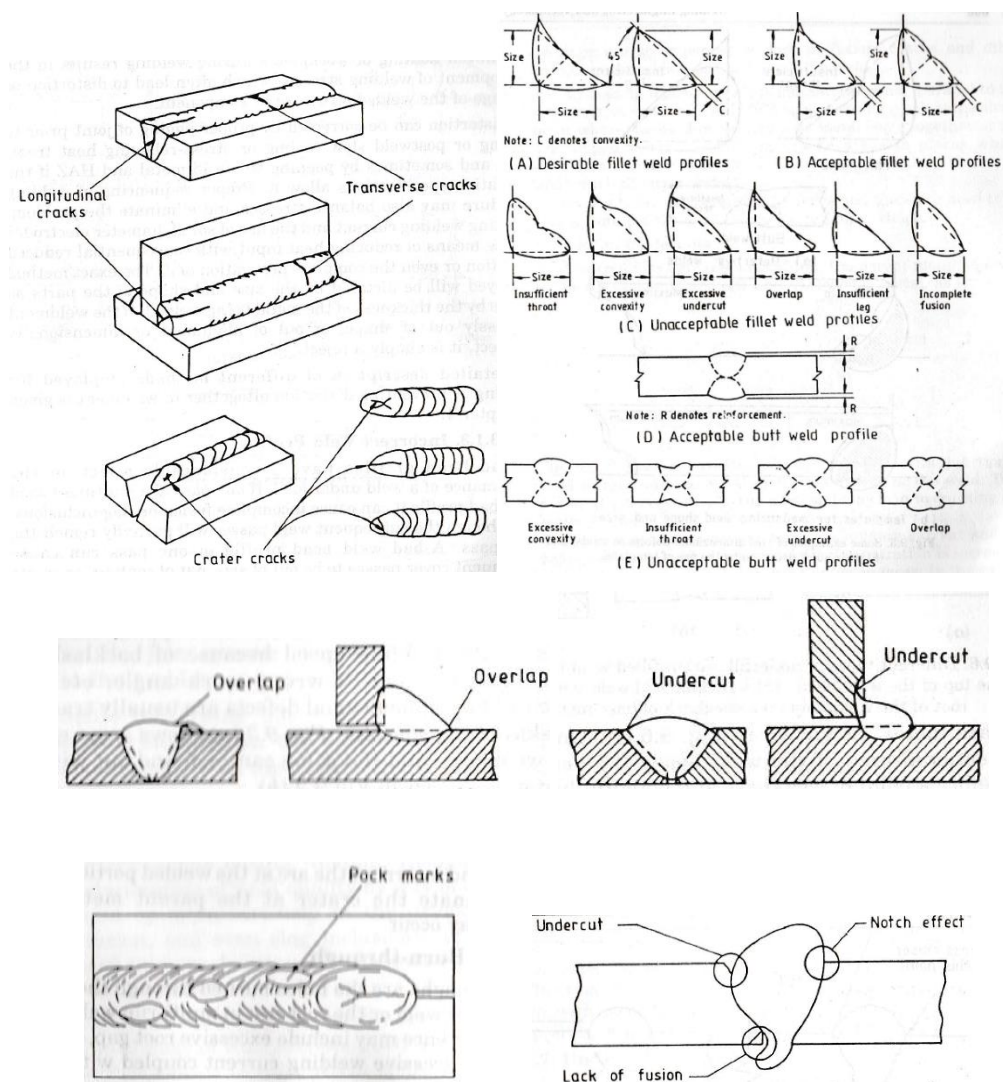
Typical examples of surface weld defects [50]
